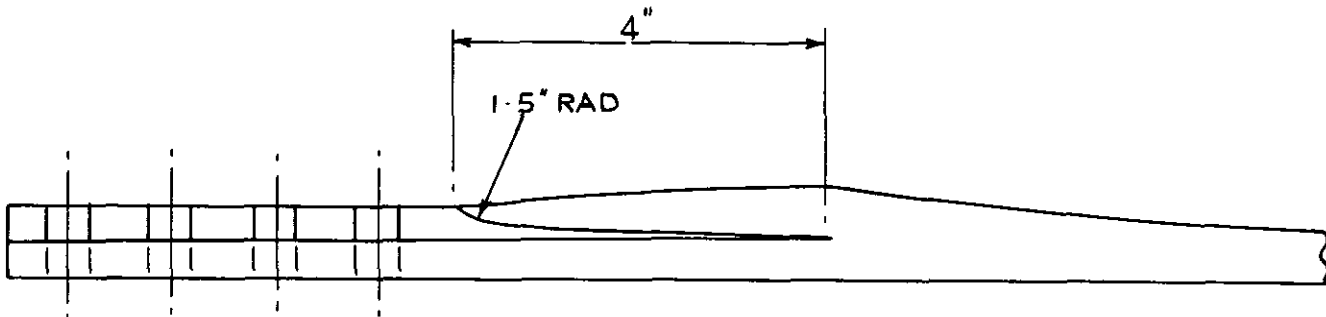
TYPICAL SECTION THRO' JOINT AS USED WITH 20" SPAN INSERT TEST PANELS & DELTA PLASTIC WING.
